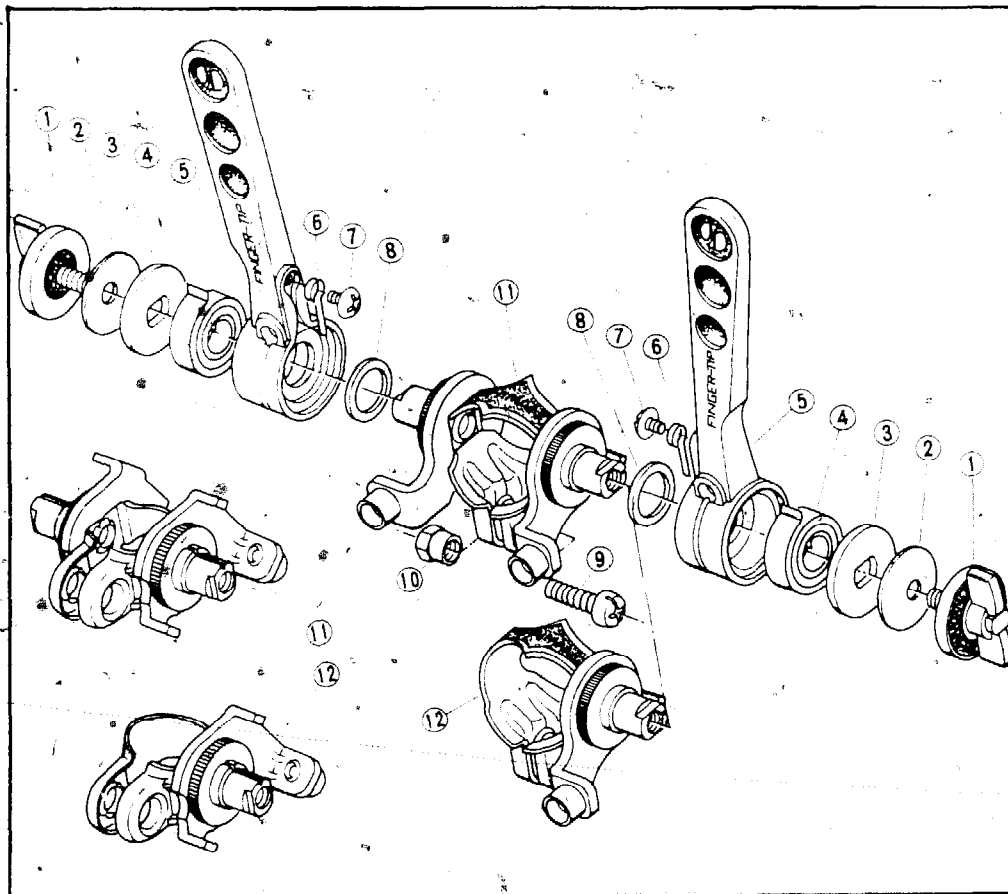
Shimano Model LB-400 shifting lever. Parts are: (1) wing bolt, (2) coned disc spring, (3) non-turn washer, (4) spiral spring, (5) lever, (6) leaf spring, (7) screw, (8) washer, (9) clamp bolt, (10) clamp nut, (11) lever clamp for 10-speed and (12) lever clamp for 5-speed.
